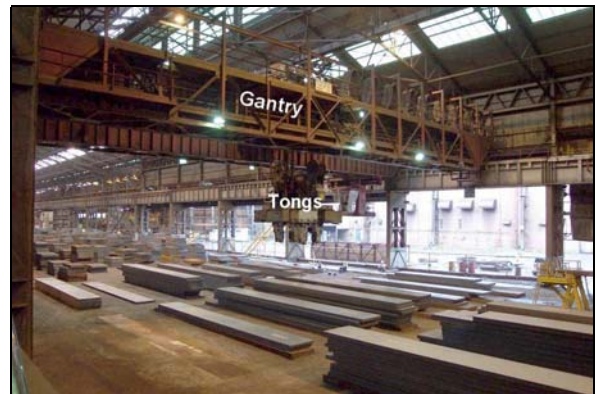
Structure of indoor crane at BlueScope steelworks for moving large steel slabs.
